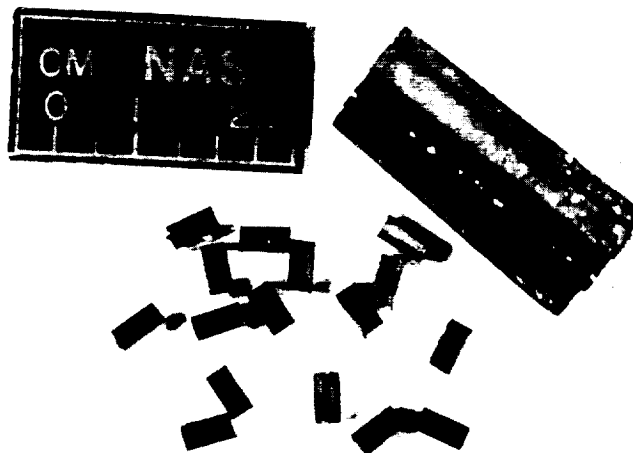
Electrostatic Discharge Machined Compression Specimens
